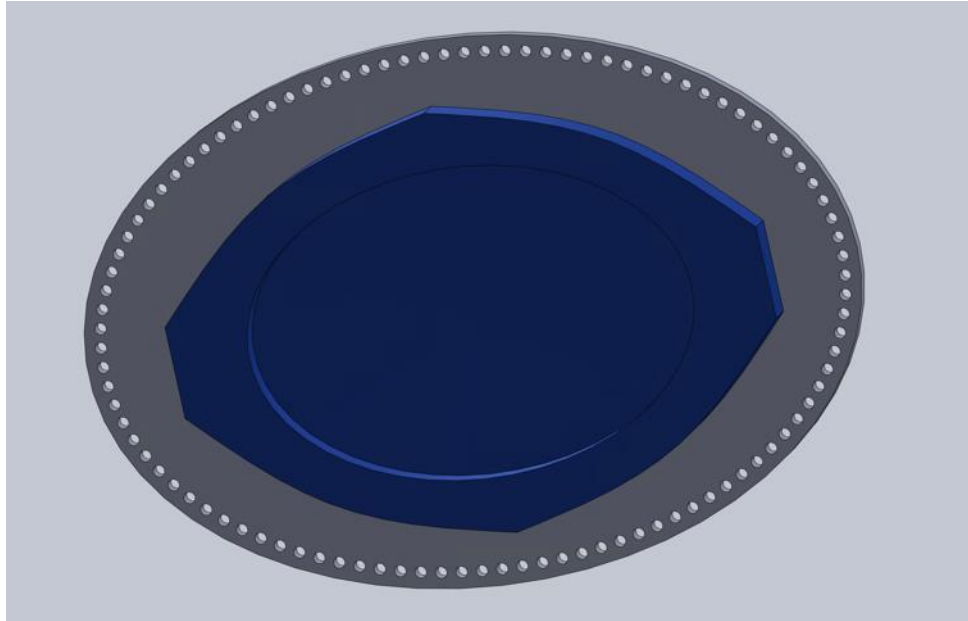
Solidworks Model of Pouch and Attachment Assembly
